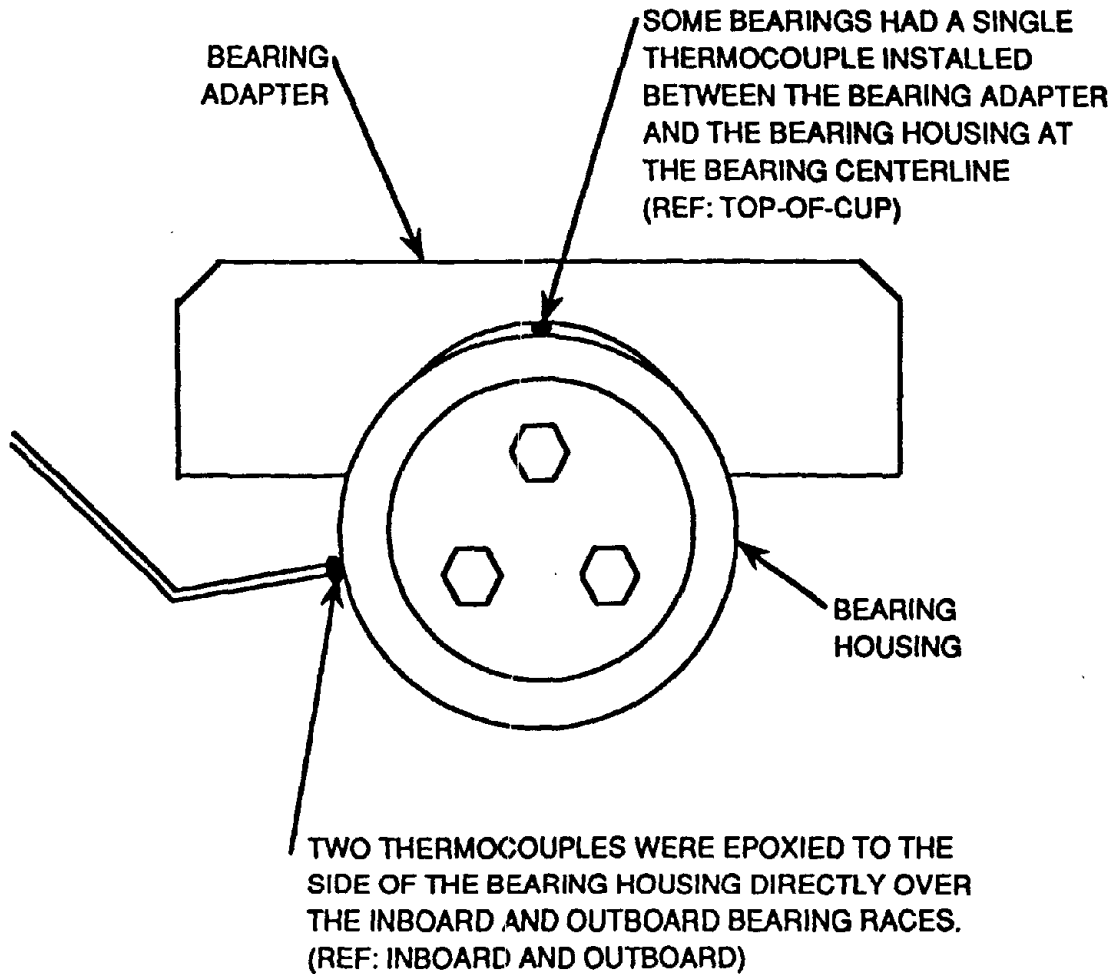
BEARING THERMOCOUPLE LOCATION
